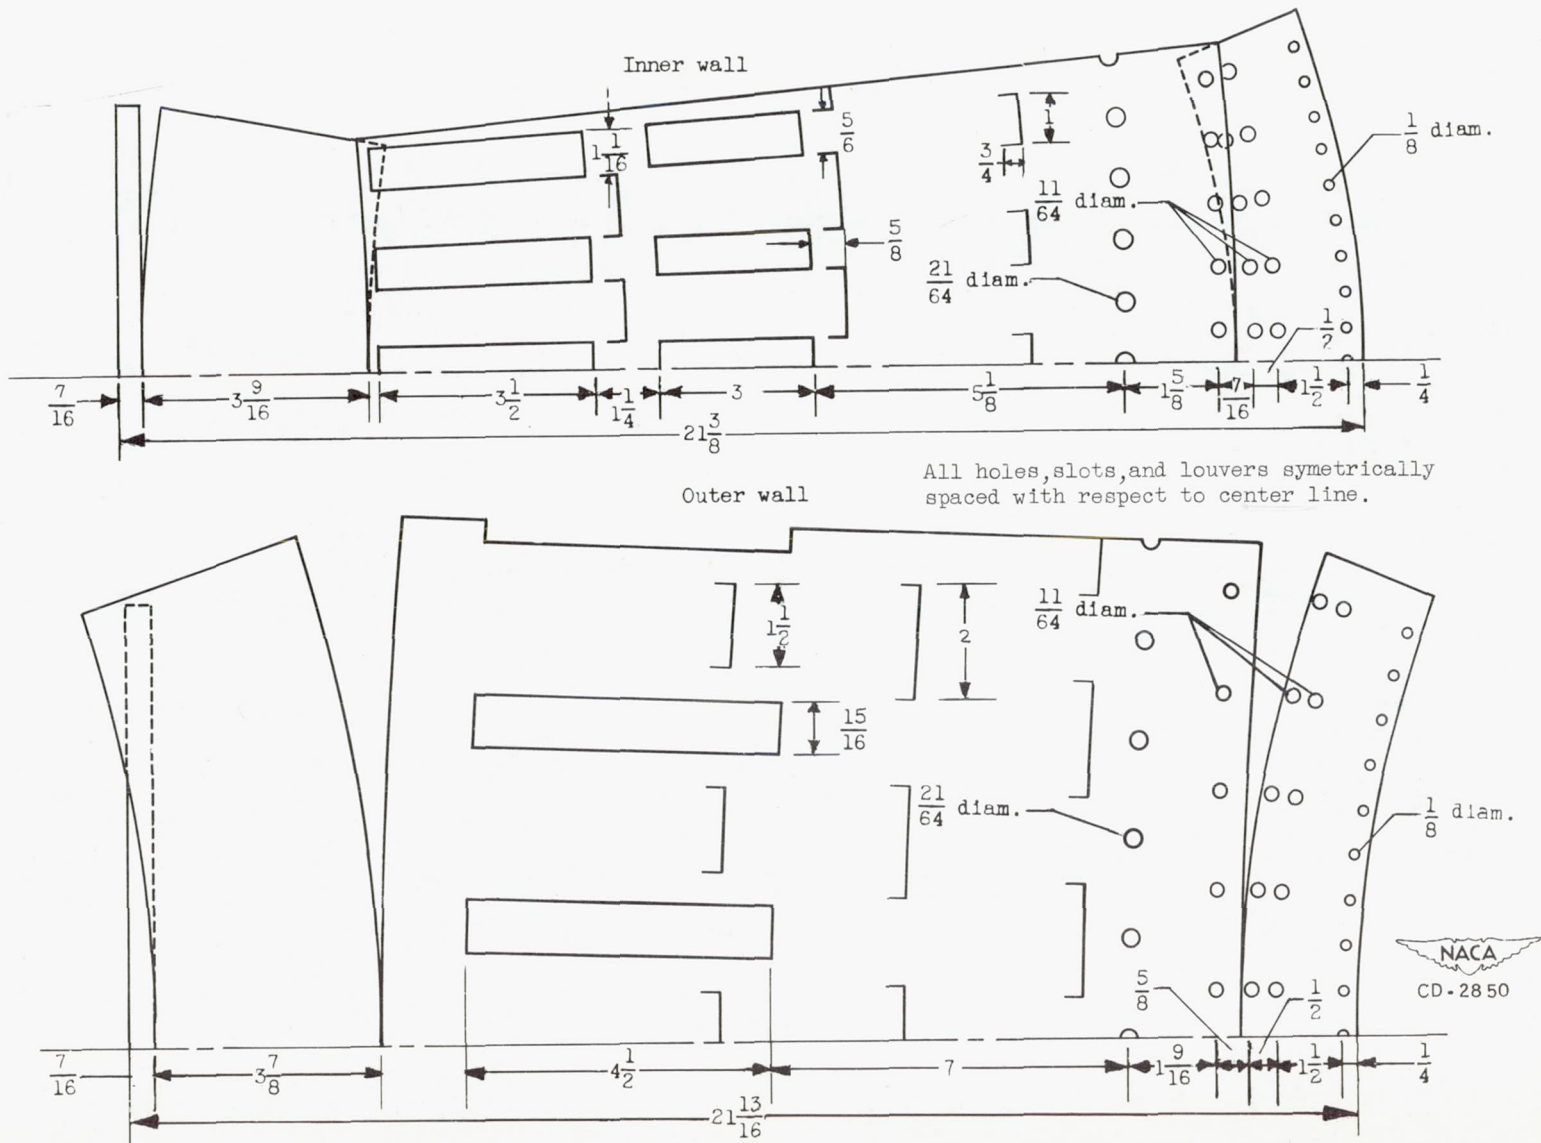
One-eighth sector developed view of liner walls of combustor model 13. (Dimensions are in inches.)
